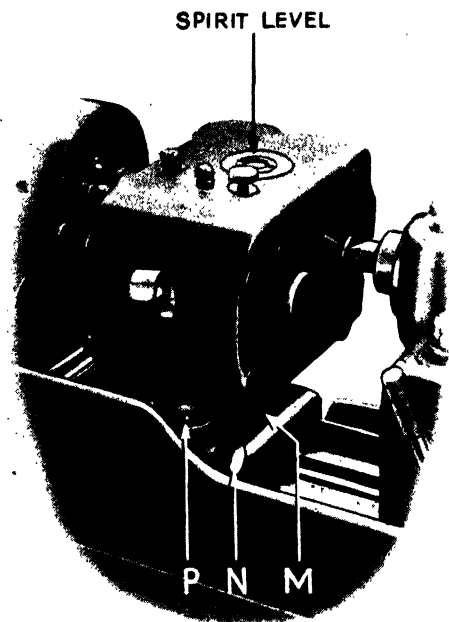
MATRIX PATENT MULTI-RIBBED WHEEL-DRESSING DEVICE AND JACK MOUNTED IN THE MACHINE
